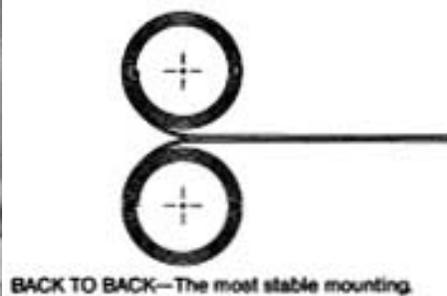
Redesigned MSL Cable Retractor with “Back to Back” Springs.
